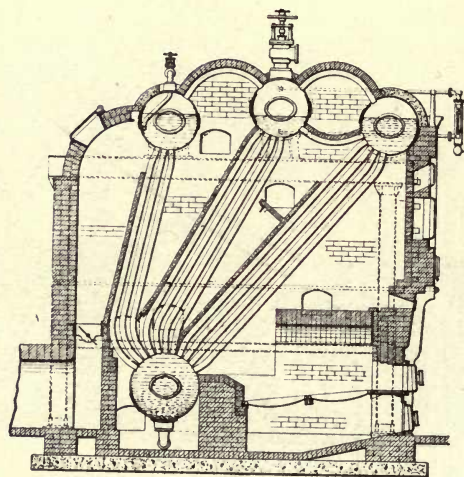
Sectional Arrangement of the Stirling Boiler, Side Elevation.
